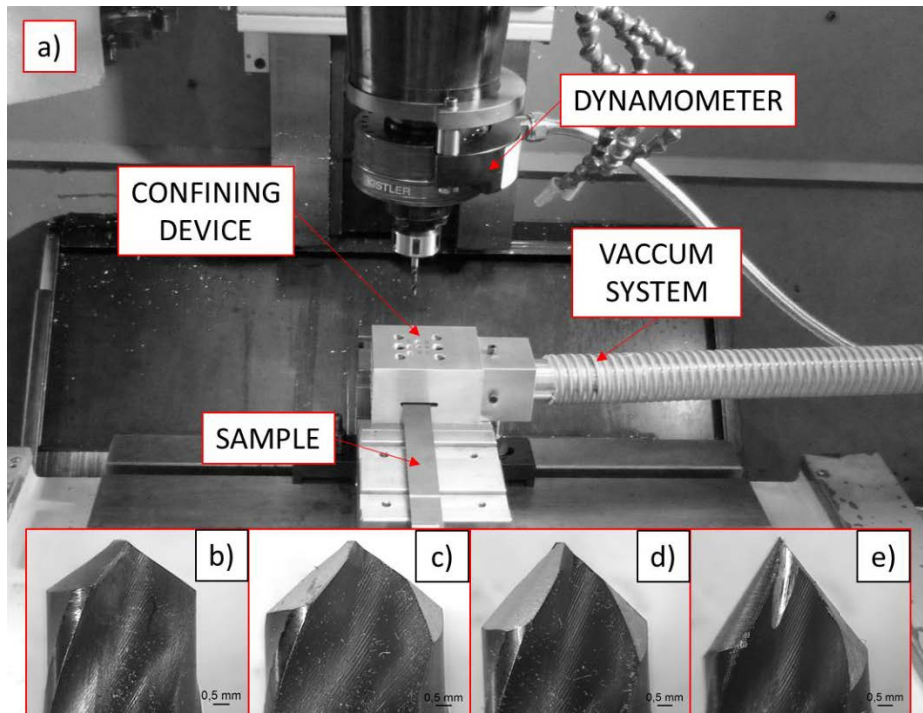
a) Configuration used in the machining center B500 Kondia during drilling tests; b) 118°; c) 100°; e) 90° and e) 70°
